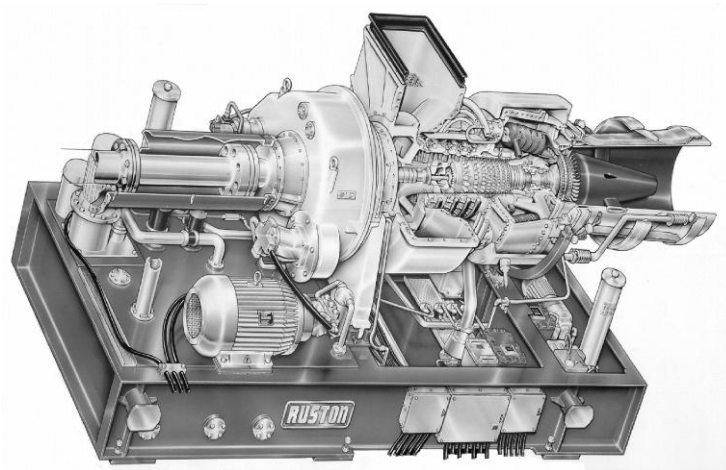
Alstom Typhoon (previously Ruston) 4900 kW single shaft gas turbine for generator drive
